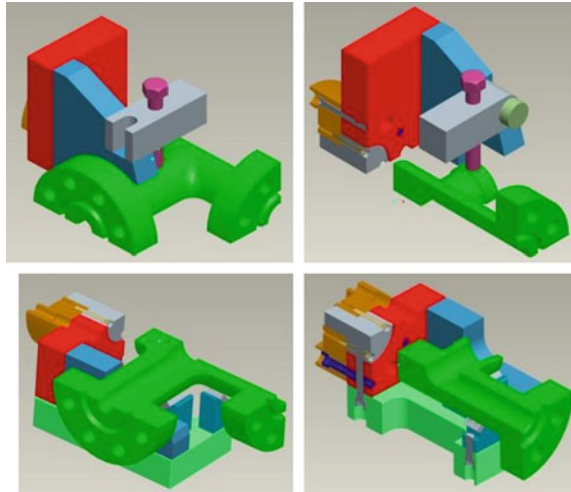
Weight and C. G. of set up-1 fixture in I quadrant
